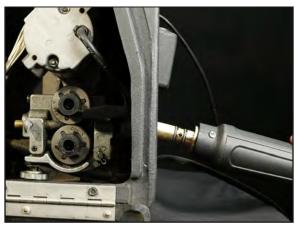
WIRE FEED CONDUIT CONNECTION
